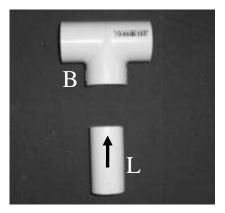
Beginning Assembly for the Medium/Large Wheelchair (Step 2).
